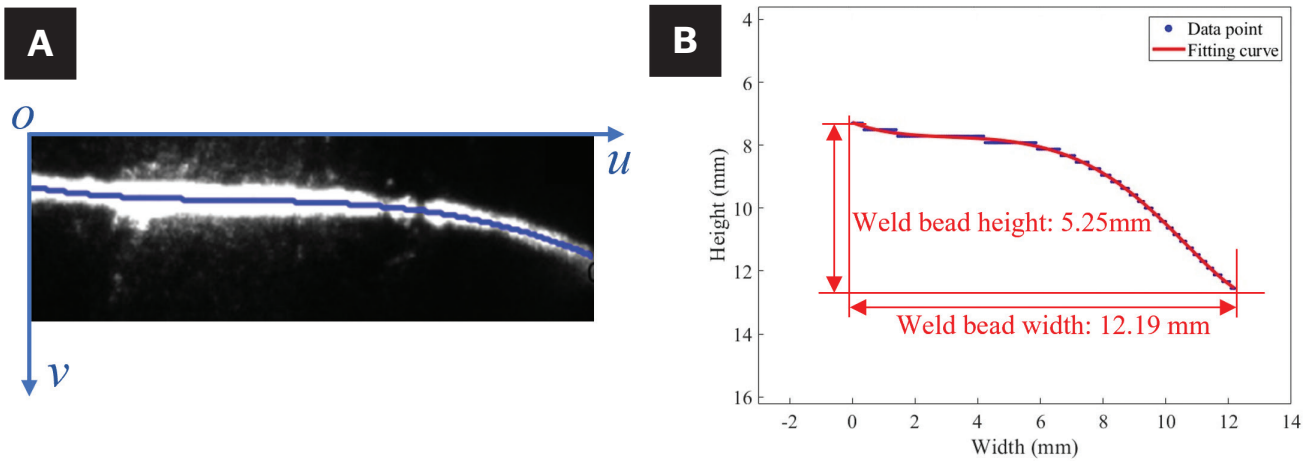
The as-welded bead fitting curve: A – Coordinate dimensions; B – actual dimensions.
